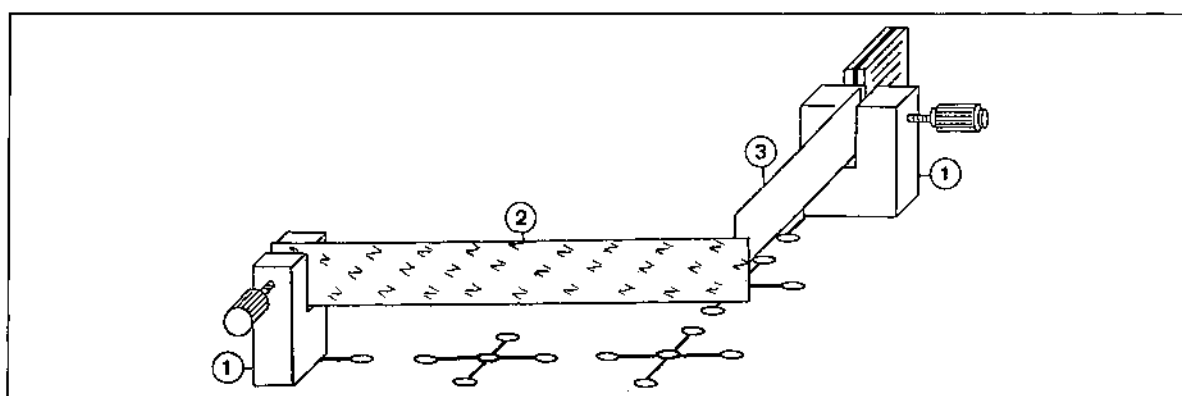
Sideways view of the bimetal strip (2) shown in fig. 1; (1) plug-in holder (3) contact strip
